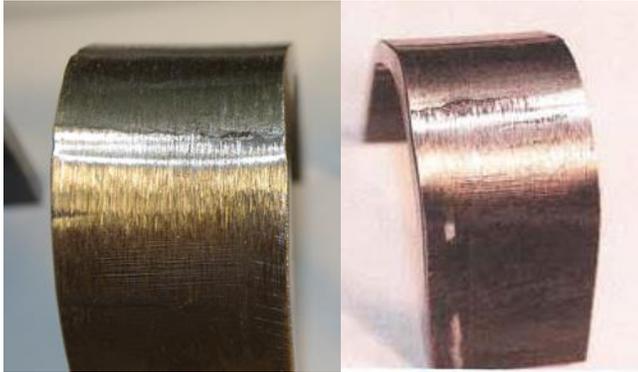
weld bends Flash® 500 (left), Flash® 600 (right)
